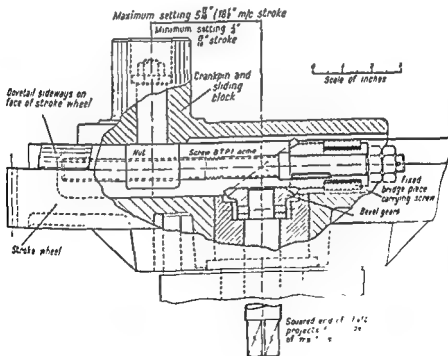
Details of Mechanism for adjusting Position of Crank Pin Block on Stroke Wheel
